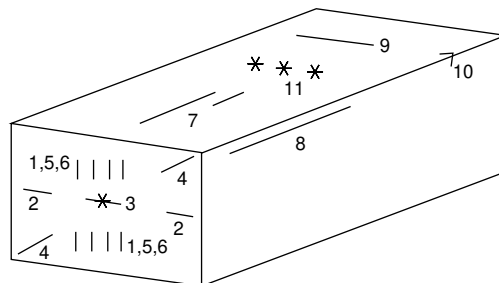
Types of cracks that may develop in the continuous casting of steel. Internal cracks: 1-midway, 2-triple point, 3-centerline, 4-diagonal, 5-straightening/bending, 6-pinch roll. Surface cracks: 7-longitudinal mid-face, 8-longitudinal corner, 9-transverse mid-face, 10-transverse corner, 11-star. Source: Ref. 19.5
